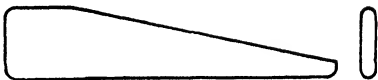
Drift or Key for Removing Drill or Collet from Socket.
